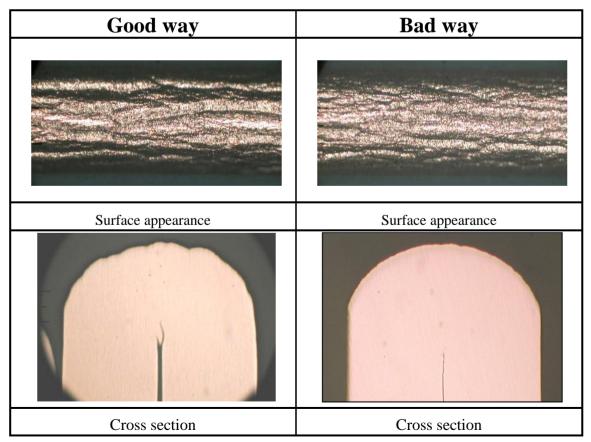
Surface appearances and cross sections of U-shaped bending test specimens. Temper H , Thickness = 0.25mm , R/t=0 , Width =10mm
